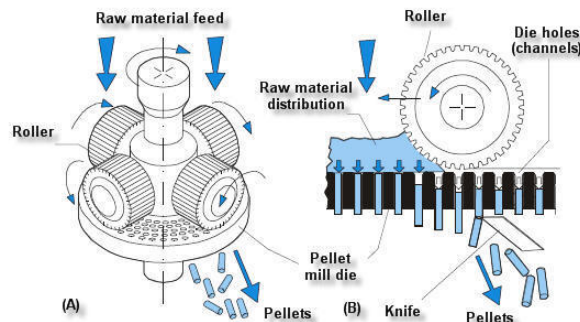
Designs and operating principles of pellet mills-Flat die pellet mill [6]
